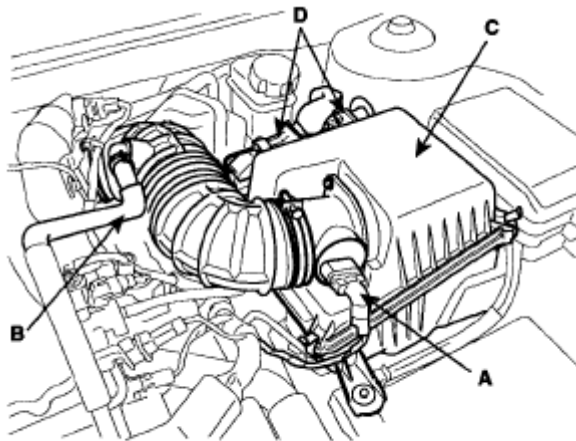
Identifying Breather Hose, MAF Connector, Air Cleaner Assembly And PCM Connectors
